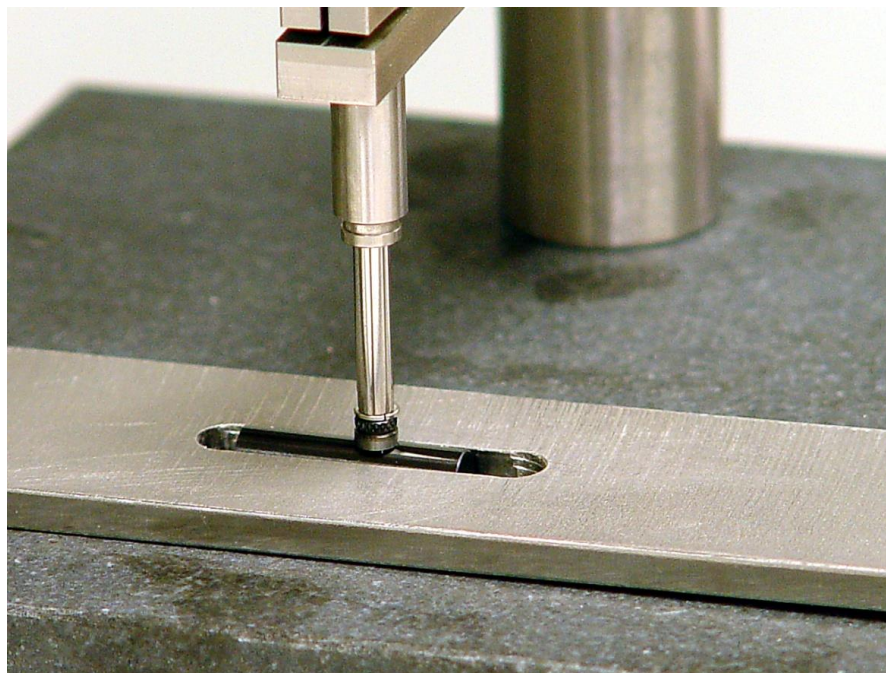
Measurement probe contacting pin gauge (black item in slot).
